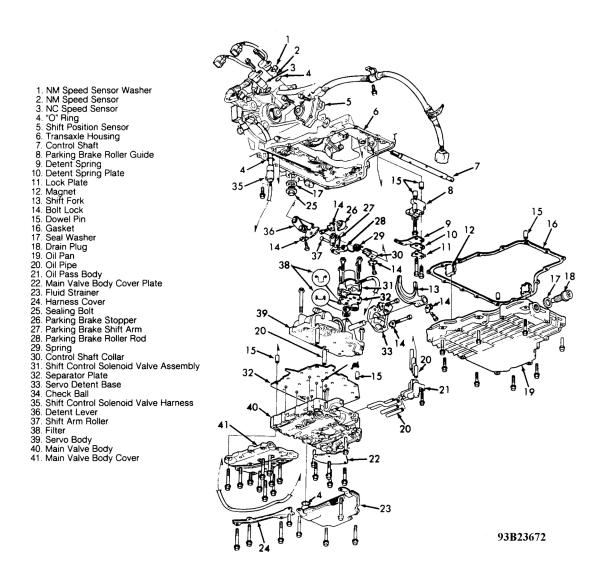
Exploded View Of Lower Valve Body Assembly Courtesy of AMERICAN HONDA MOTOR CO., INC.
